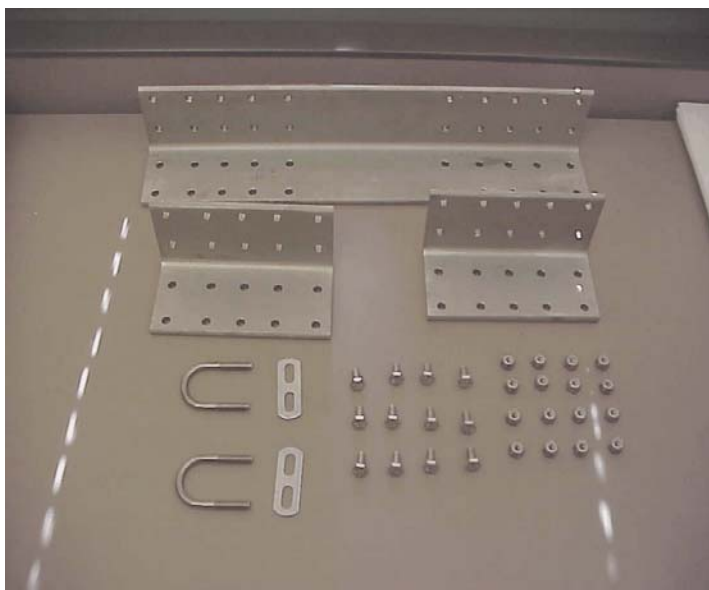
Unassembled view of Reconfigurable Antenna Mounting Bracket
